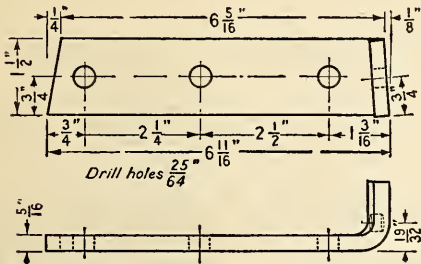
Connecting plate for knife bracket, John Deere corn binder
